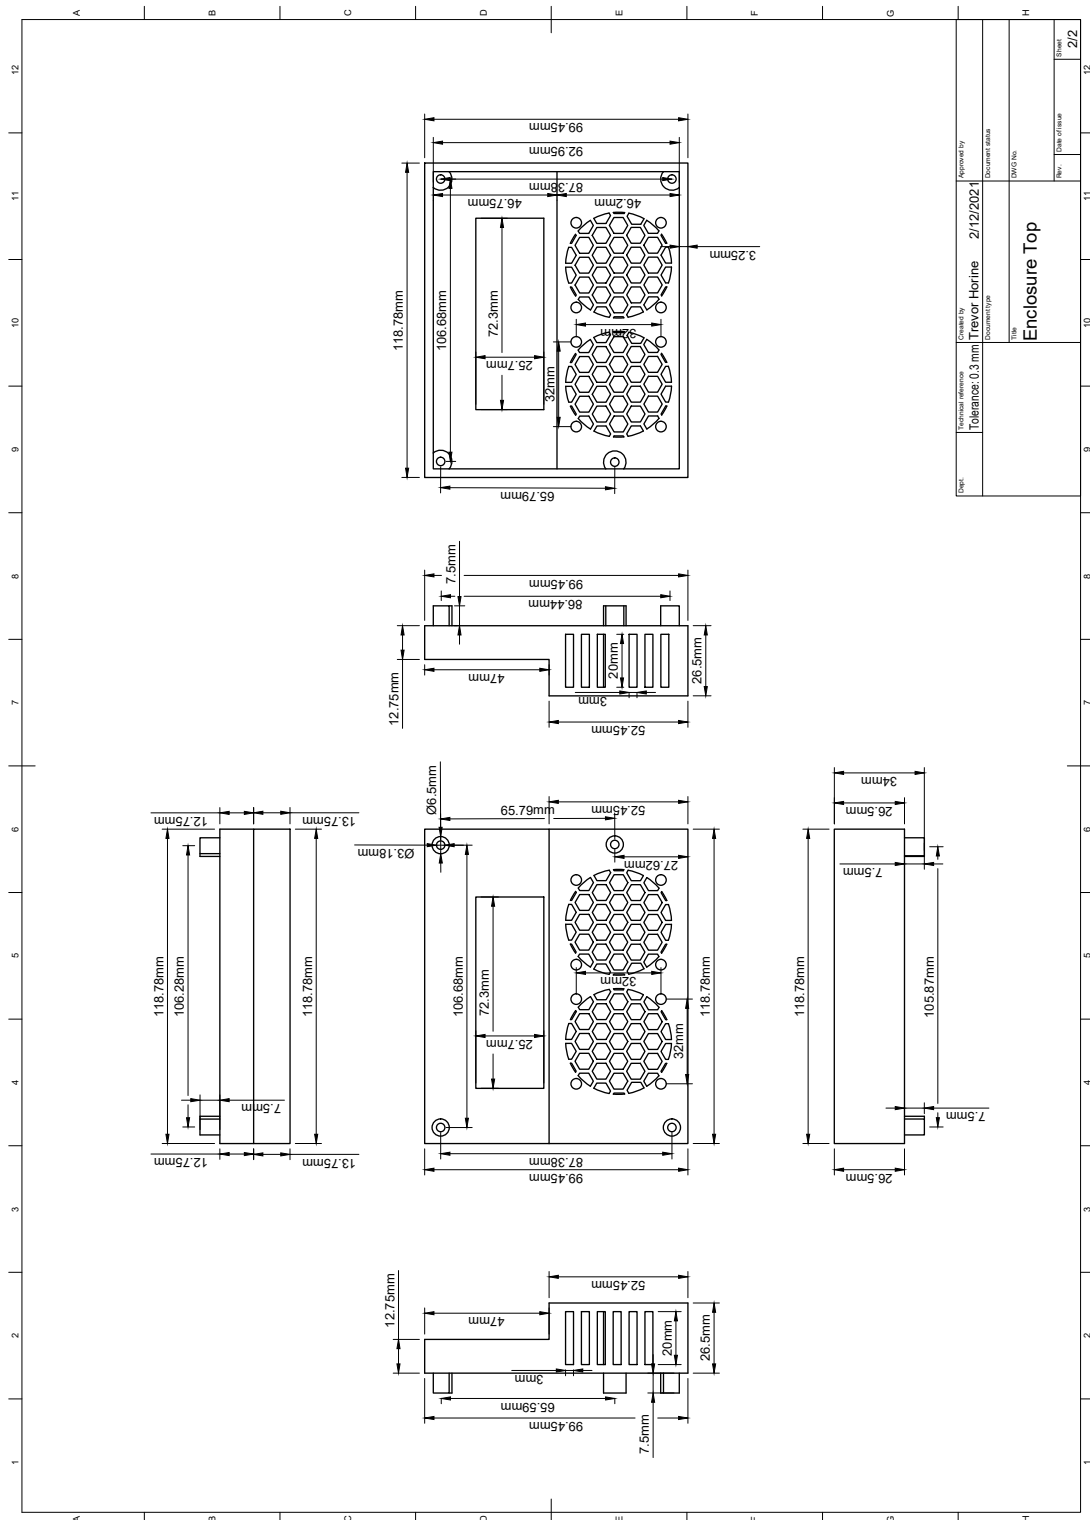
Mechanical drawing of the top half of the enclosure designed to hold the PCB.
